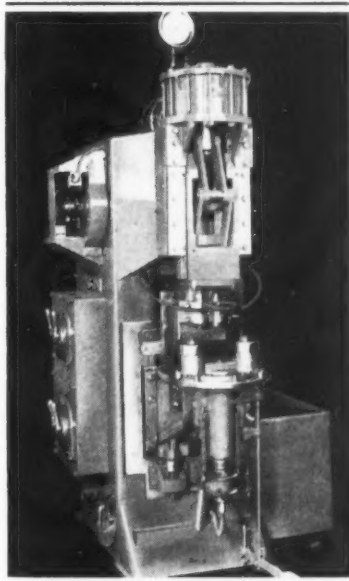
Machine for Welding Plugs in Oil Filters
